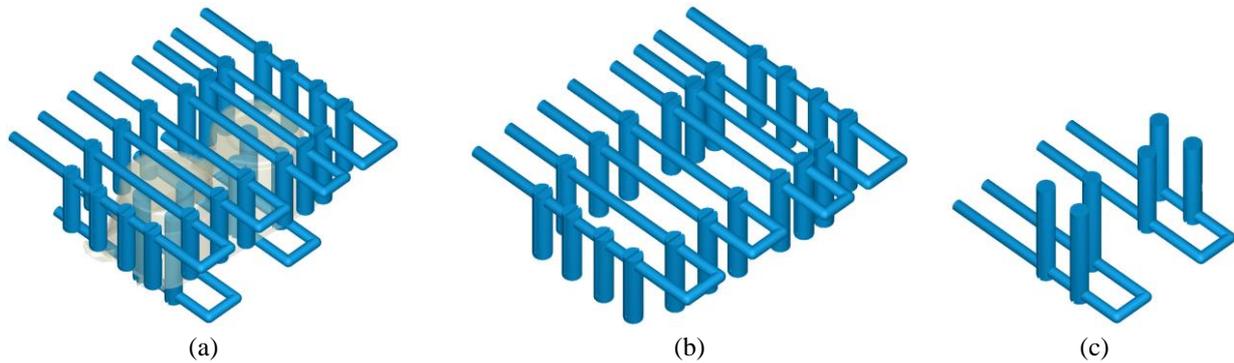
(a) Initial cooling circuits layout (b) Cavity side (c) Core side
